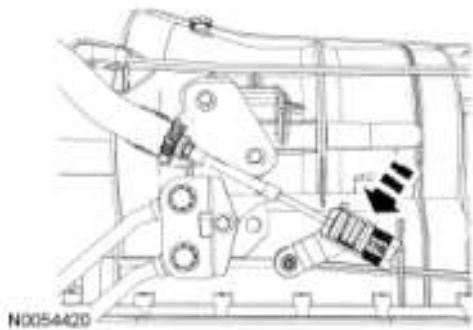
Locating Transmission Fluid Cooler Tube Bracket Bolt
